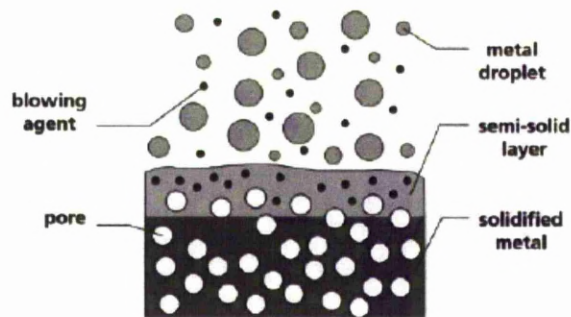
Manufacture of cellular material by spray forming with a blowing agent. [4]
